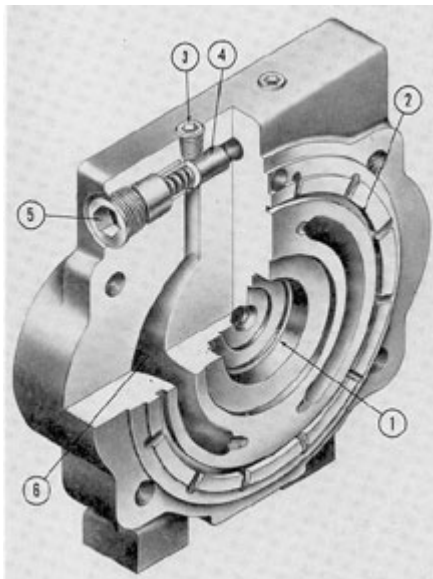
Cutaway of valve plate. 1) Main shaft bearing; 2) collector channel; 3) air vent; 4) replenishing valve; 5) replenishing valve retainer plug; 6) port.
